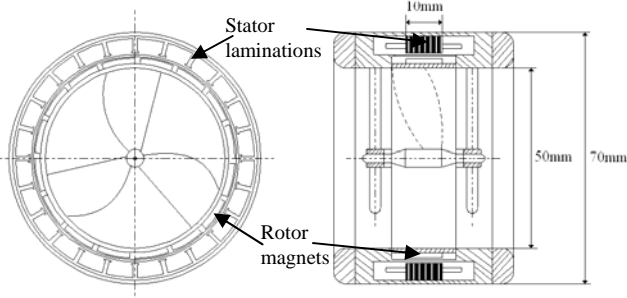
A drawing of a rim driven thruster designed by the Authors [1]
